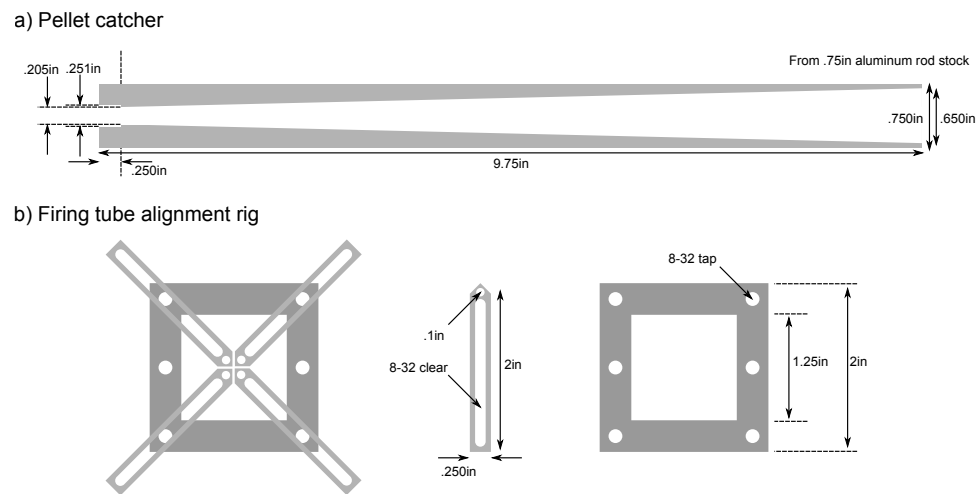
New parts installed on the pellet injector including a) larger diameter bore pellet catchers and b) an alignment jig.
